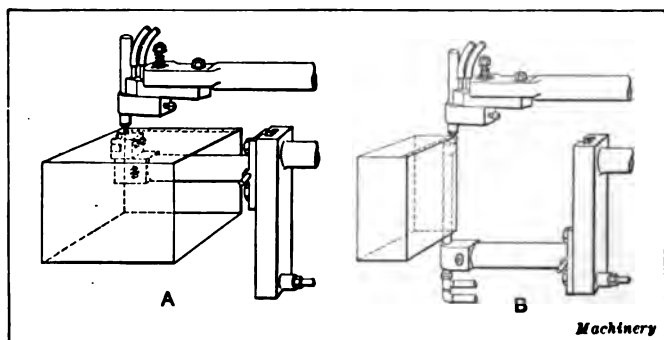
Diagram illustrating Two Different Types of Electrode Horns for Welding Boxes
